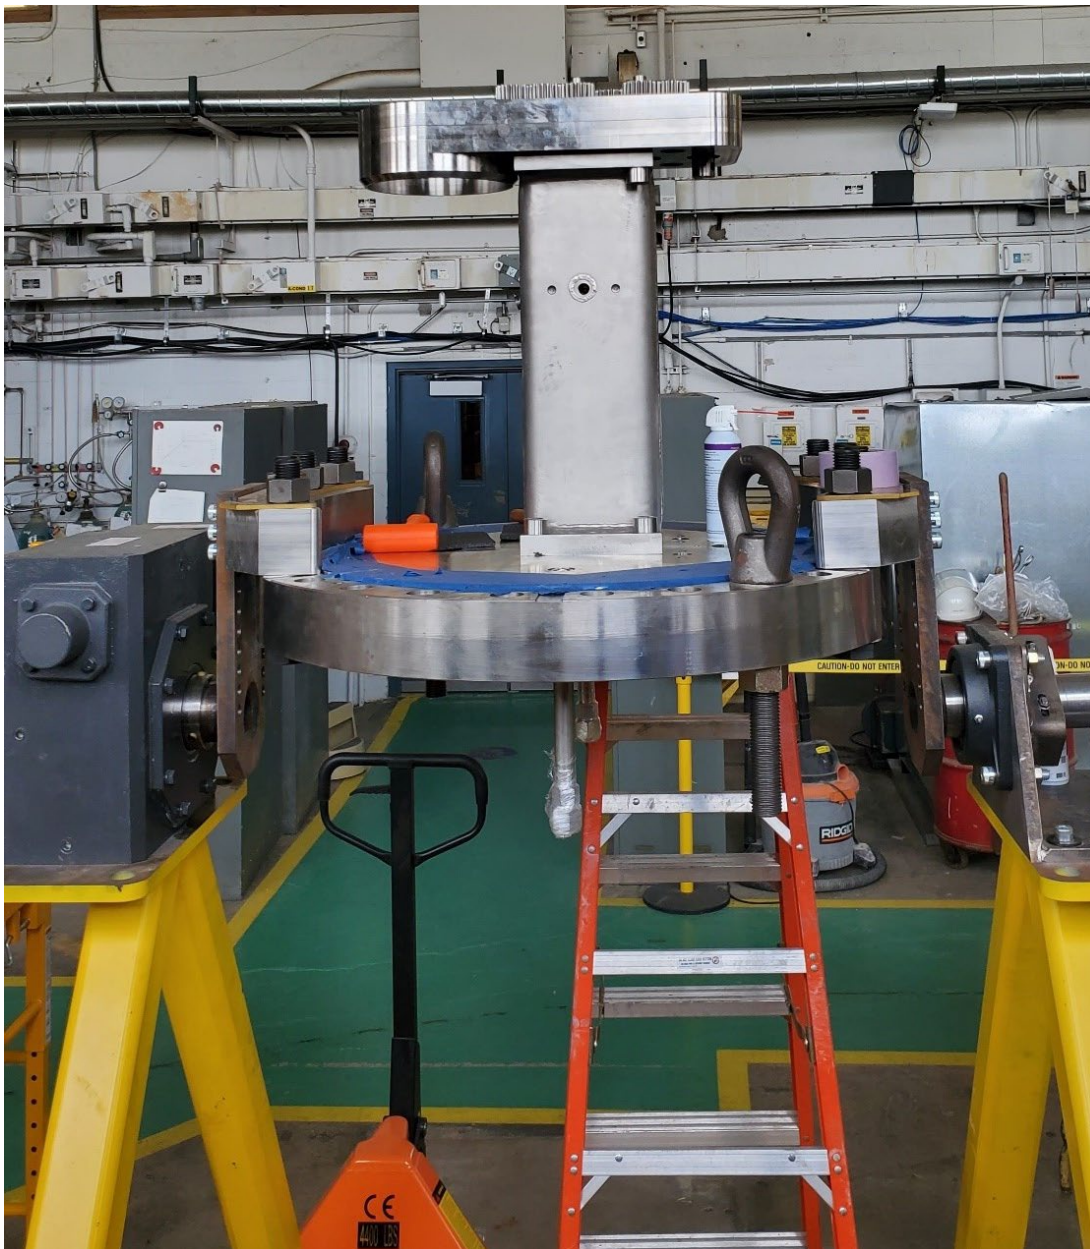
Main flange mounted to the vessel stand, with the support column and gearbox assembly.
